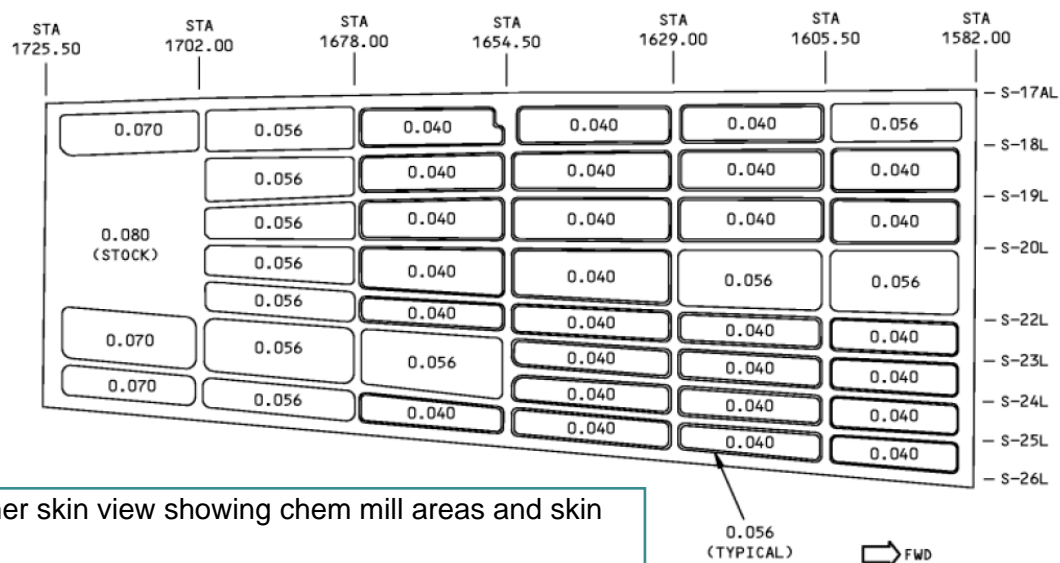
Inner skin view showing chem mill areas and skin thickness.
